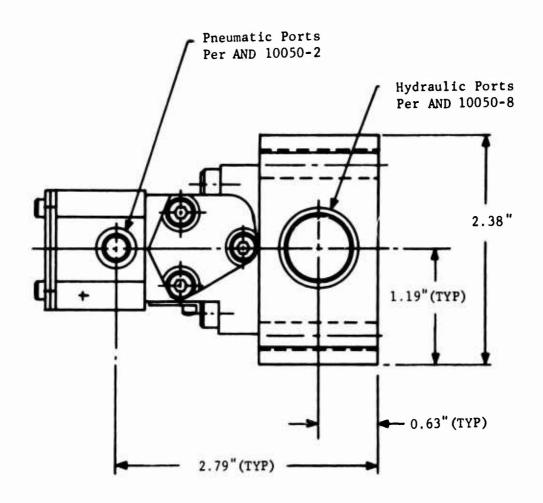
Installation Drawing of Pneumohydraulic Transducer (1 of 2).
